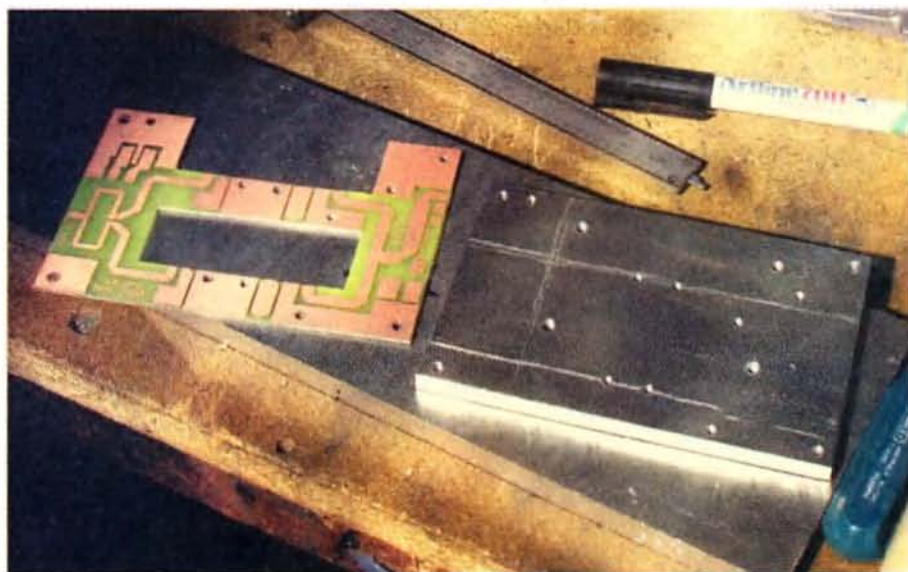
The printed circuit board and heat spreader in preparation for assembly.
